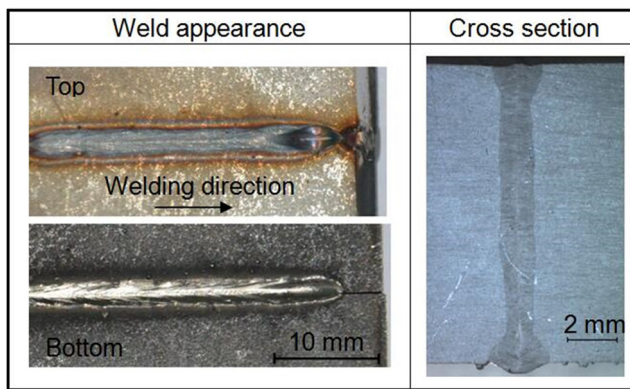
Weld appearance and cross section of the butt joint with bottom-shielding argon gas
